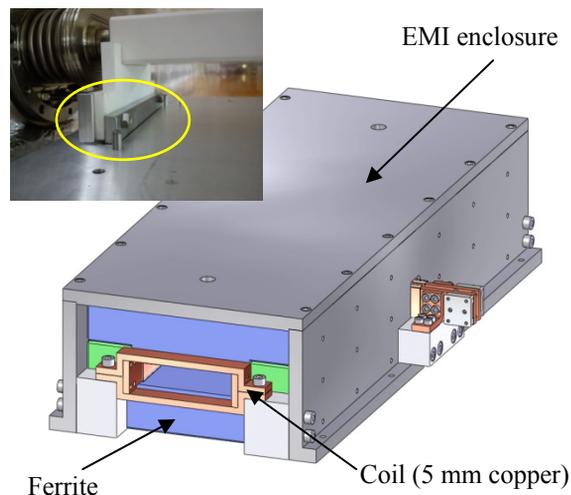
Kicker prototype engineering drawing and gap between kicker magnet and ceramic chamber.
